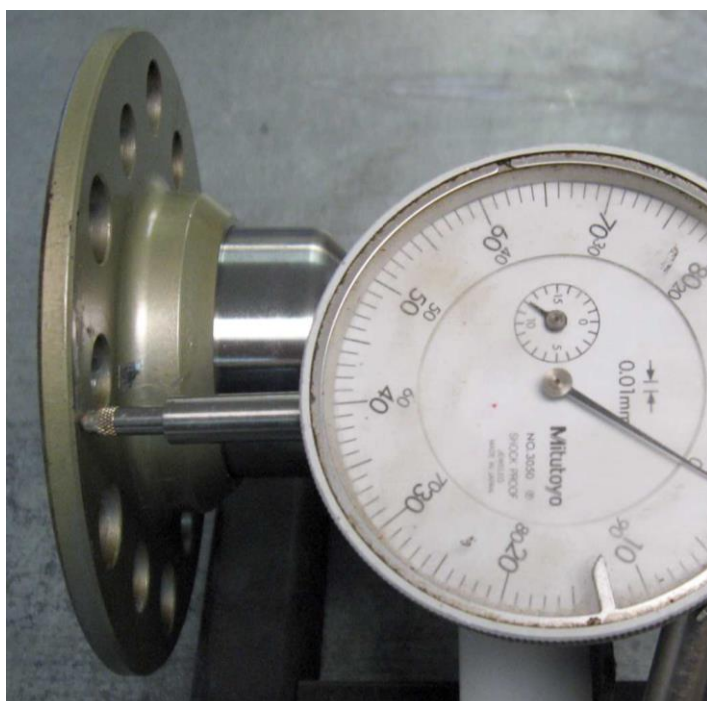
Dial Indicator Position for Crankshaft & Prop Flange Run Out
